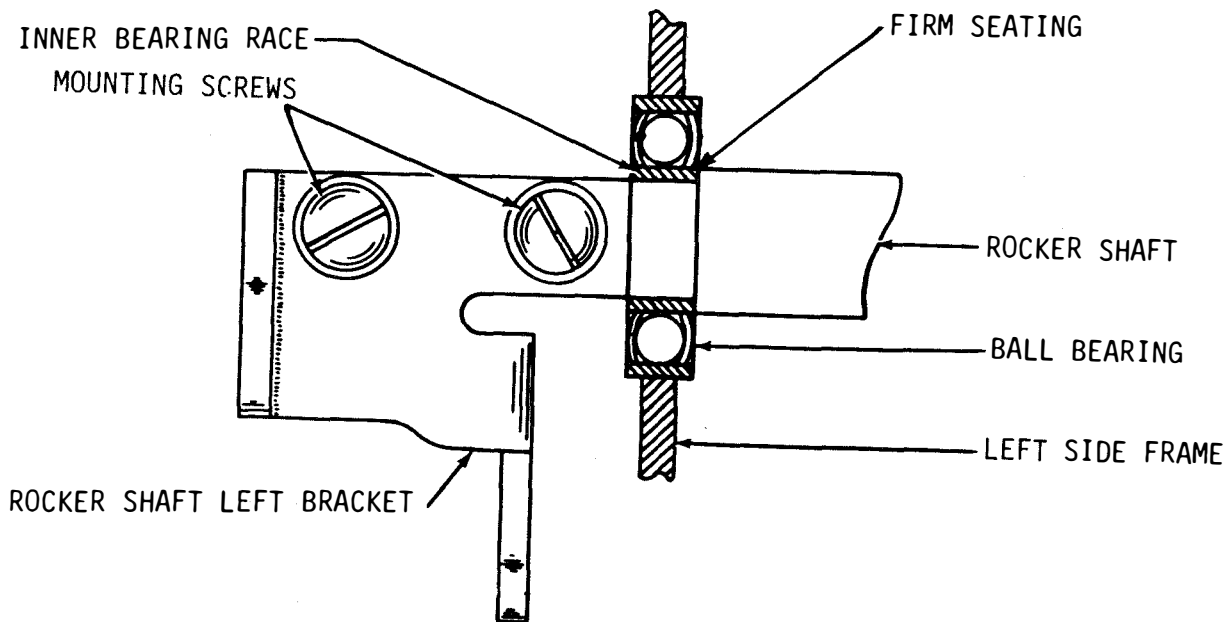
Rocker Shaft Left Bracket, Right Side View
